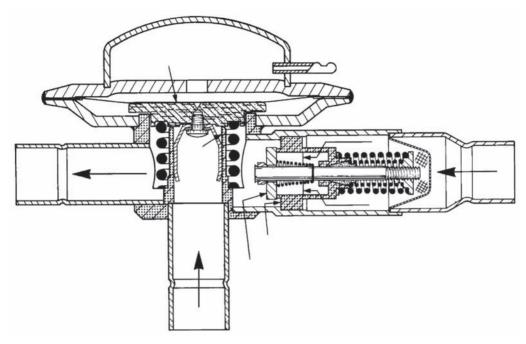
Operation of a nonadjustable head pressure control valve. (Courtesy of Sporlan Valve Company).
